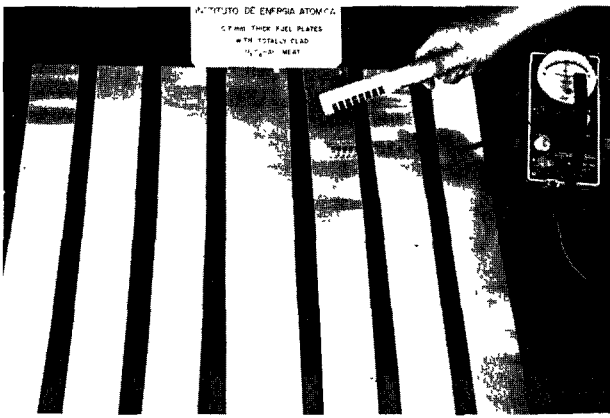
0.7 mm thick fuel plates (ends of the plates)
